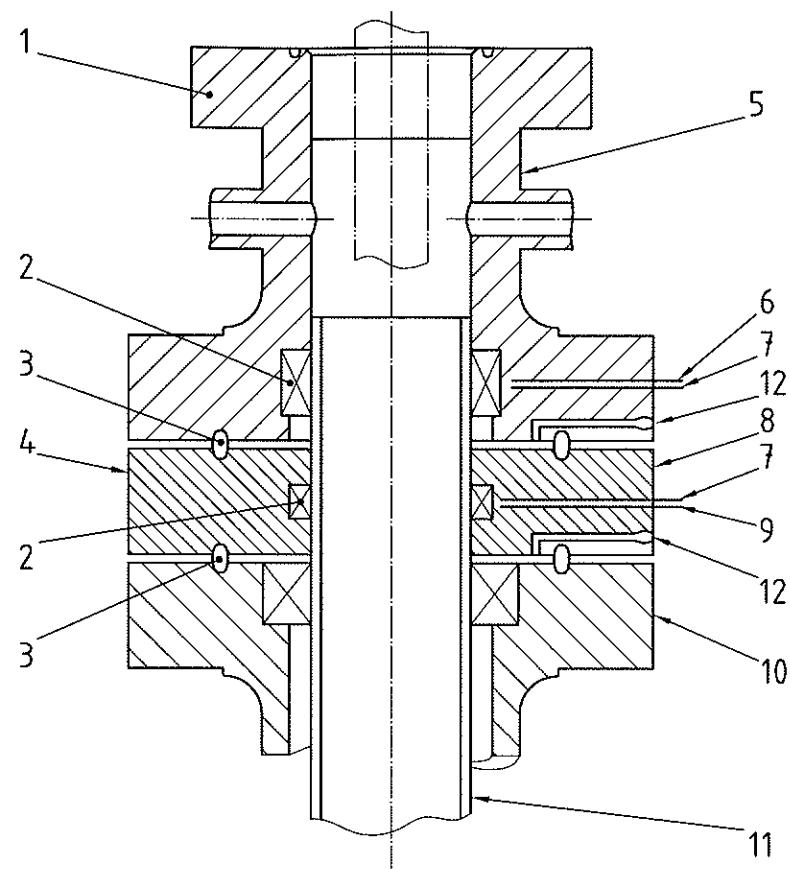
Cross-over spool with restricted-area pack-off supported by lower head
